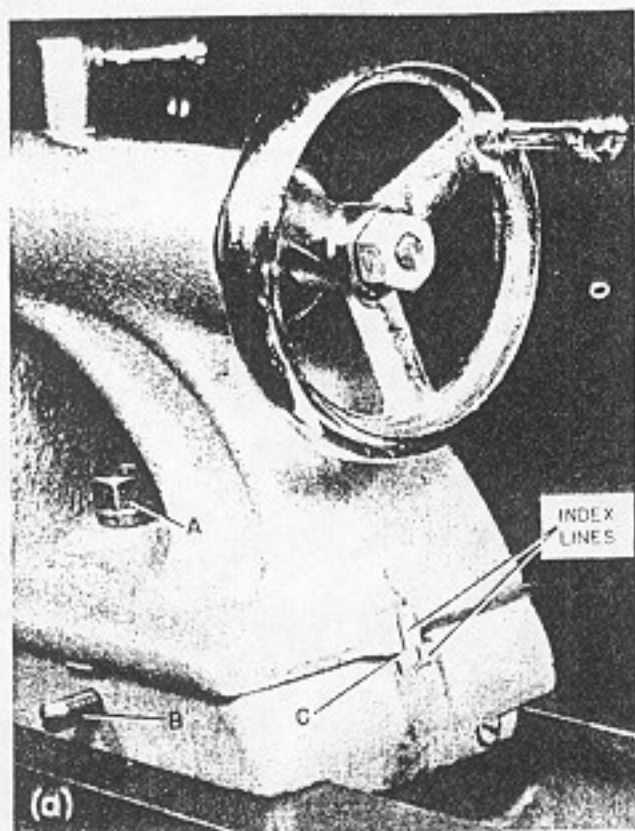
The tailstock center should be offset toward the front of the lathe for turning most tapers.
